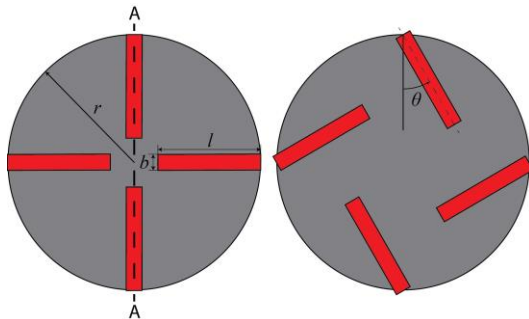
Drawing of the hydrodynamic bearing designs used to show the self-healing bearing principle. The angle θ indicates the angle of all four magnets.
